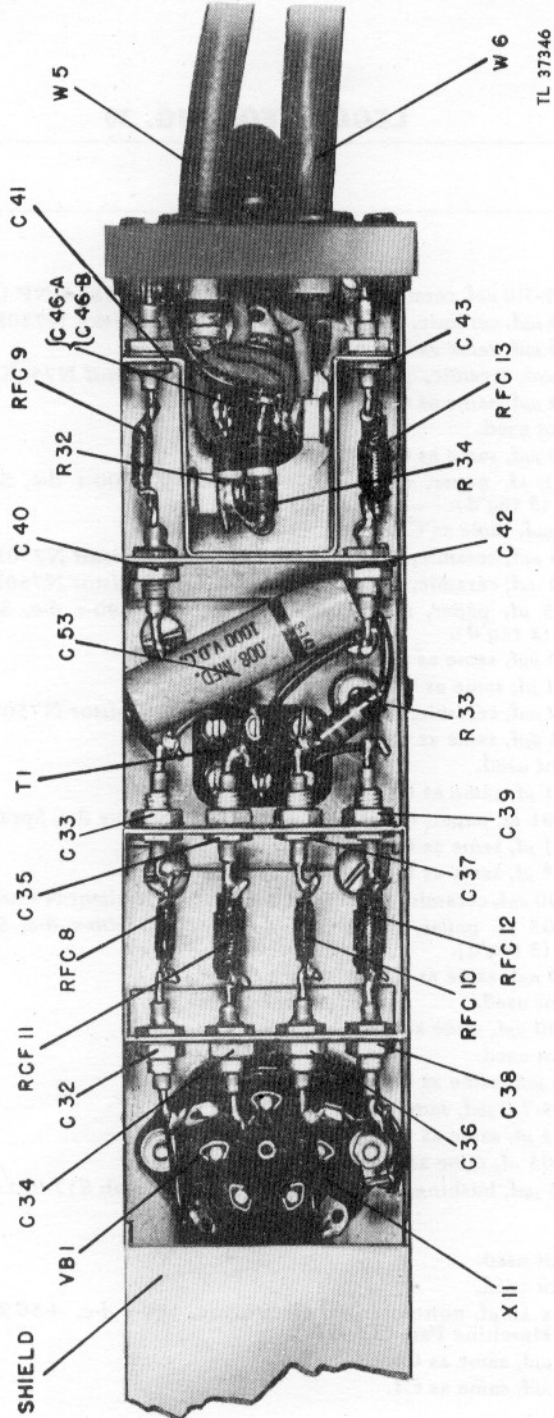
Vibrator Power Supply *PP-11A/PPN-1, left side view with case removed.
